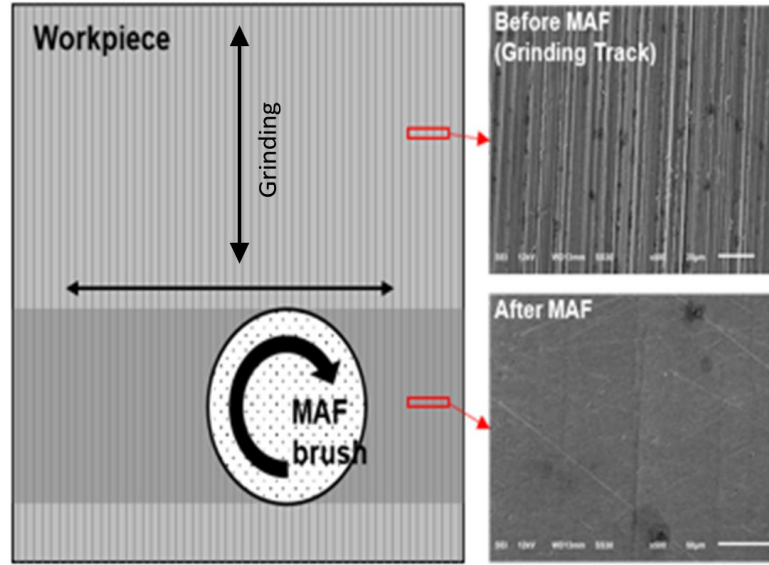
Designed tool path of MAF (left). The tool path is perpendicular to the grinding direction. Surface patterns before (upper right) and after (lower right) MAF process
